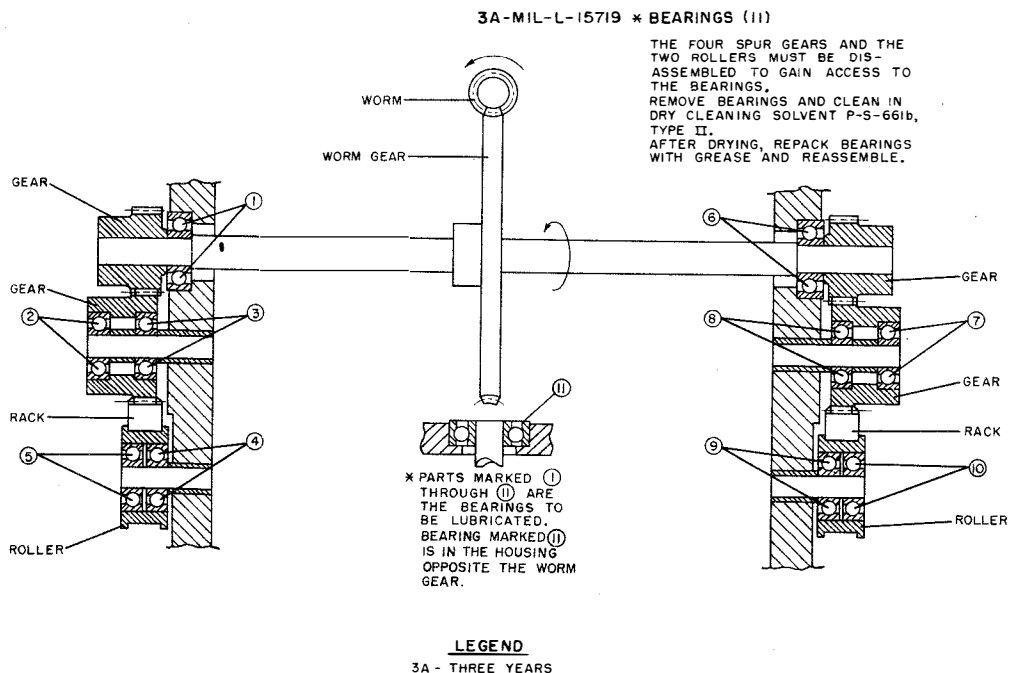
R-f Tuner, Cross Section of Main Drive Bearings, Lubrication
